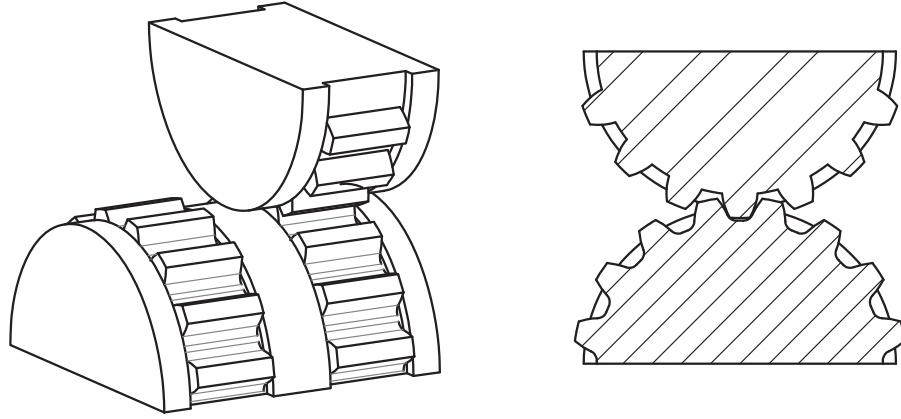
LEFT: Three rolling contact surfaces with gearing in between RIGHT: Cross section of meshing gears with rolling contact surfaces at the pitch diameter
